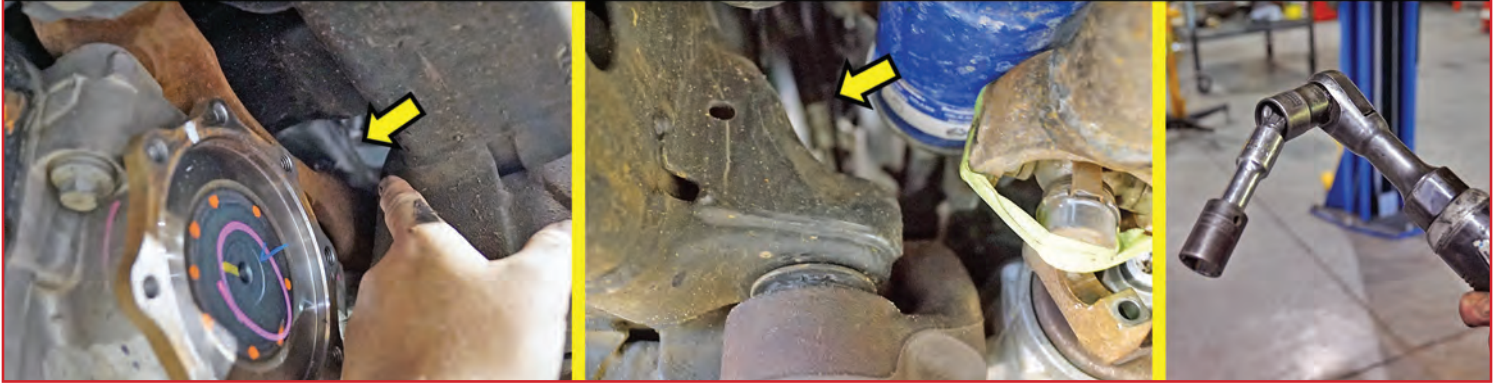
B] TECH TIP: The top rear bolt is hard to reach. You may have to access the bolt from the rear by going through the opening near the driveshaft. Our tool of choice was a small ratchet with a swivel socket, a 3 inch extension and 15mm socket.
